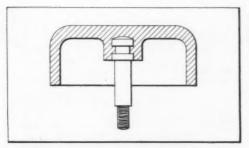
If the Insert Does Not Pass Through the Casting, but is Shrouded, it is Necessary to Provide Separate Loading and Unloading Fixtures
